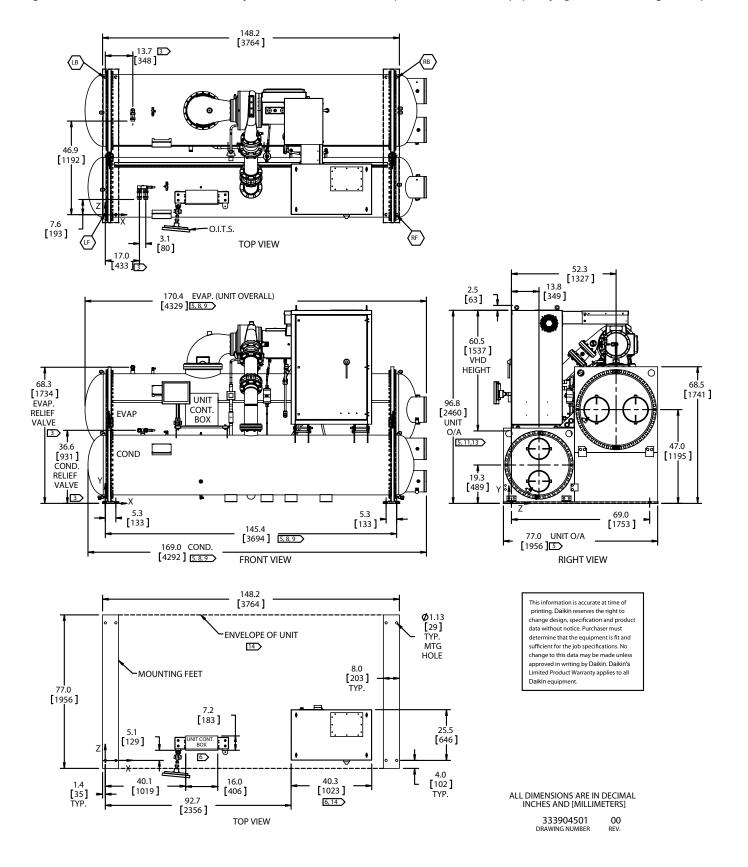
WME0500 - E3612/C3012 - 2-pass - M2 Standard Motor (50Hz 380/400/415V - 60Hz 380/575V)
